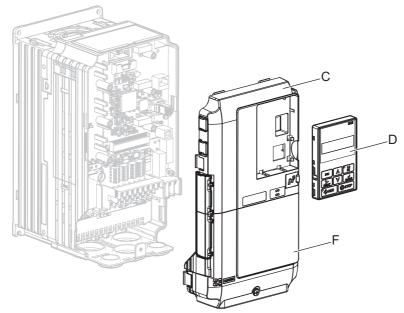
Remove the Keypad, Front Cover, and Terminal Cover
